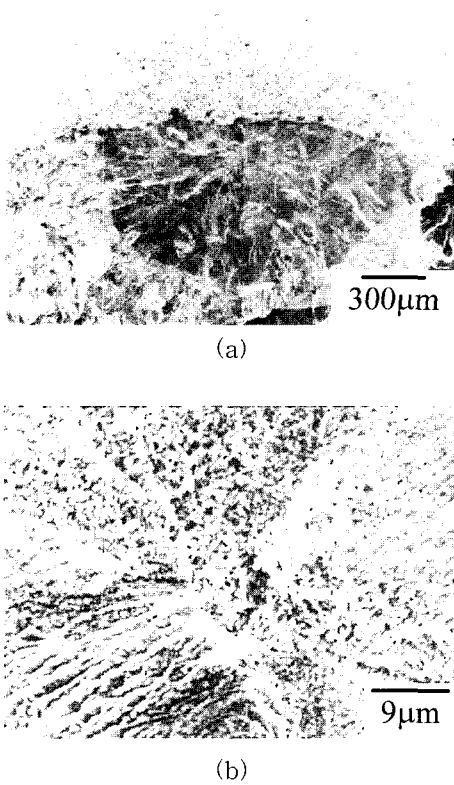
Typical micrographs of fatigue fracture surface tested at $S=410$ MPa, $N_f=4.45 \times 10^6$ cycles for (a) the specimen with 0.5 mm thick coating and (b) magnified view of the fatigue crack initiation site.
